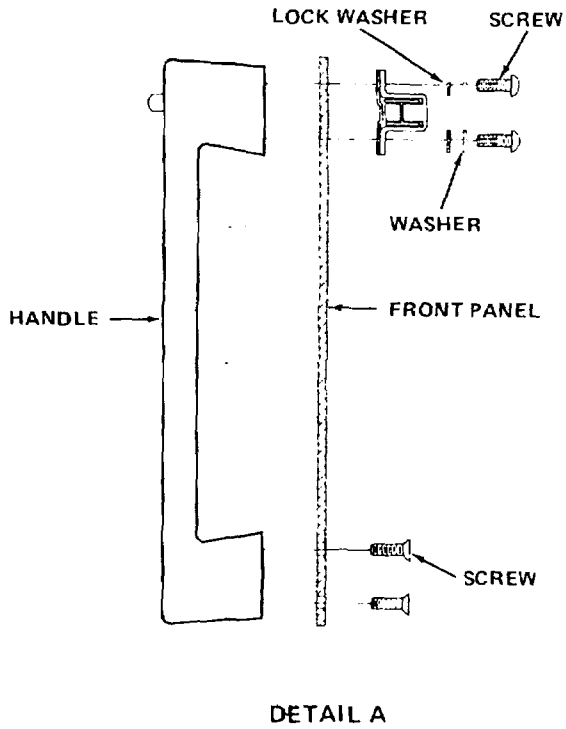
Radio Transmitter Front Panel and Chassis-Mounted Parts Location Diagram (Sheet 3 of 3)
